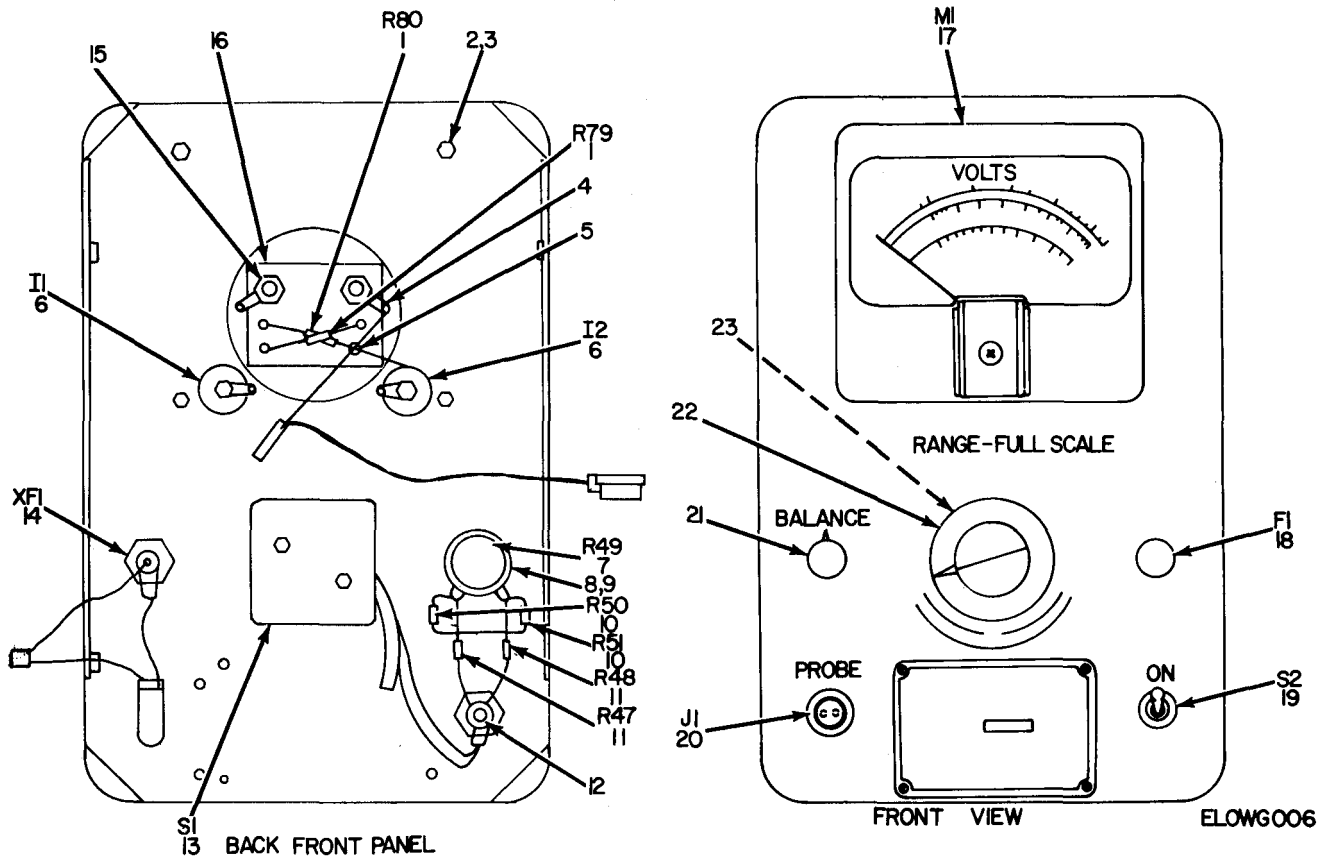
Voltmeter, Electronic ME-247/U or ME-247A/U, Panel Assembly.
